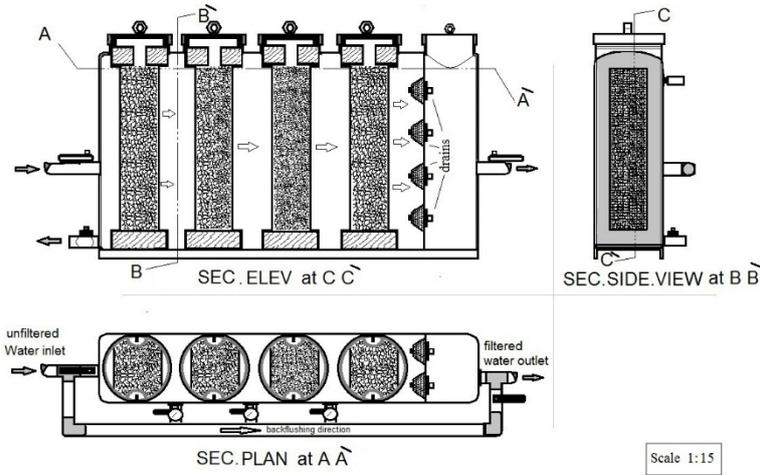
Sectional views of elevation, side view and plan with the water movement across the proposed filter.
